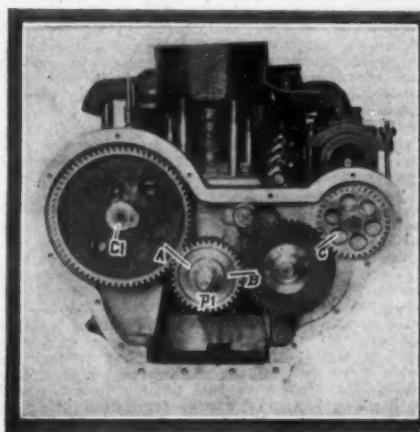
Half-time train of a motor showing the gears in the housing, the cover being removed, and the method advised for the identifying of the meshing teeth
